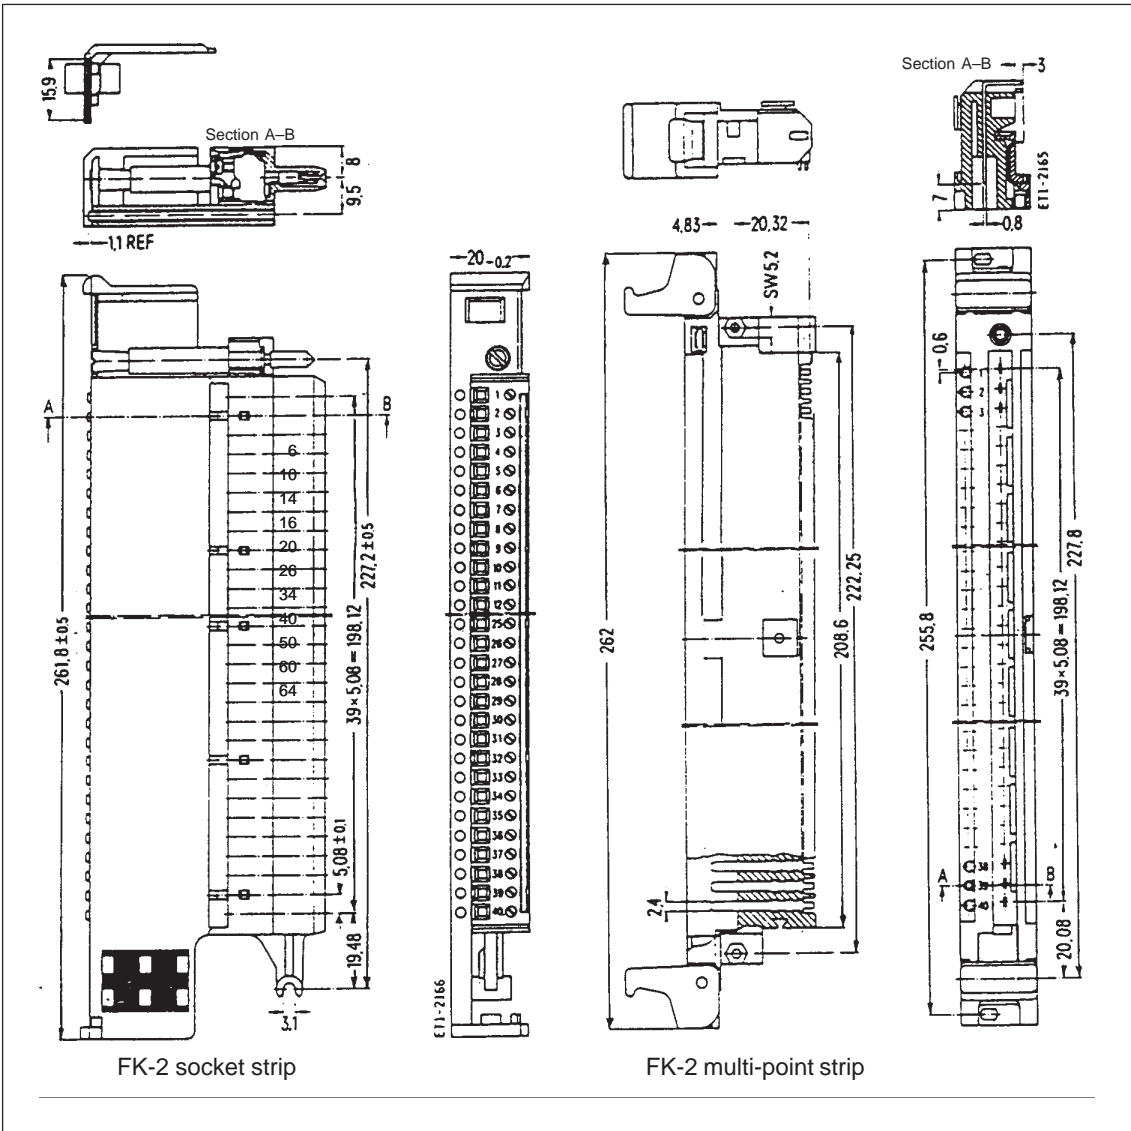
Dimensional drawing of the FK-2 front plug-in connector
